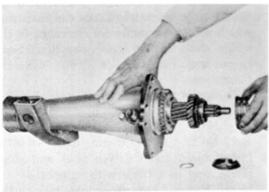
Removing Clutch Hub Synchronizer Ring etc.
